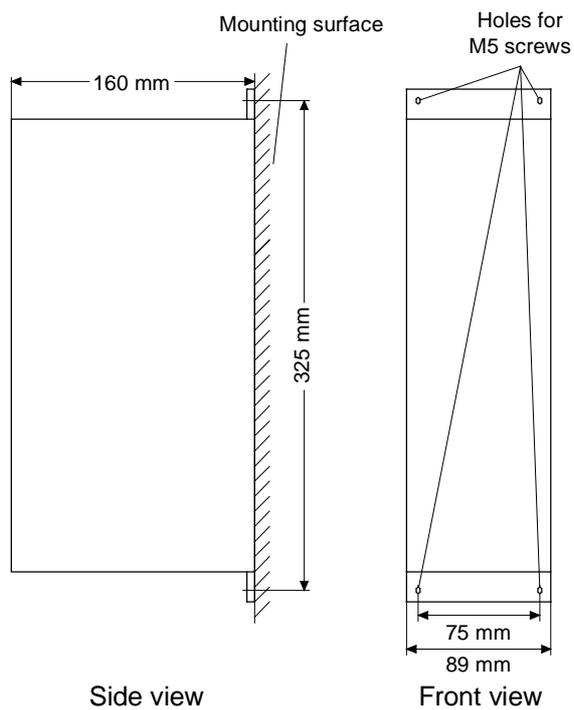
Dimension drawing of the 12 A / 18 A EMC filter
